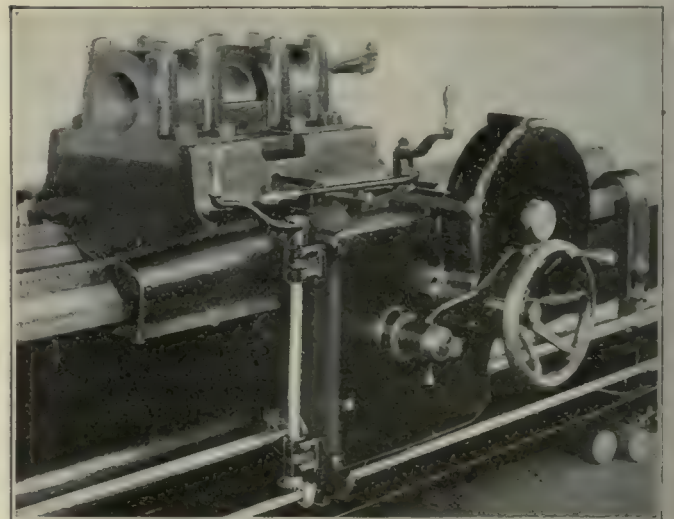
A NEAR VIEW OF THE CARRIAGE SHOWING THE CONTROL LEVERS
